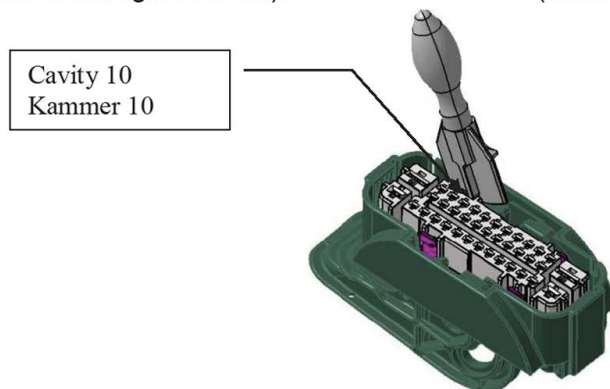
38-way connector, , positioning the operating tool; the operating tool has to be manufactured according to the drawing Nr 1 928 H00 394, see figure 39
